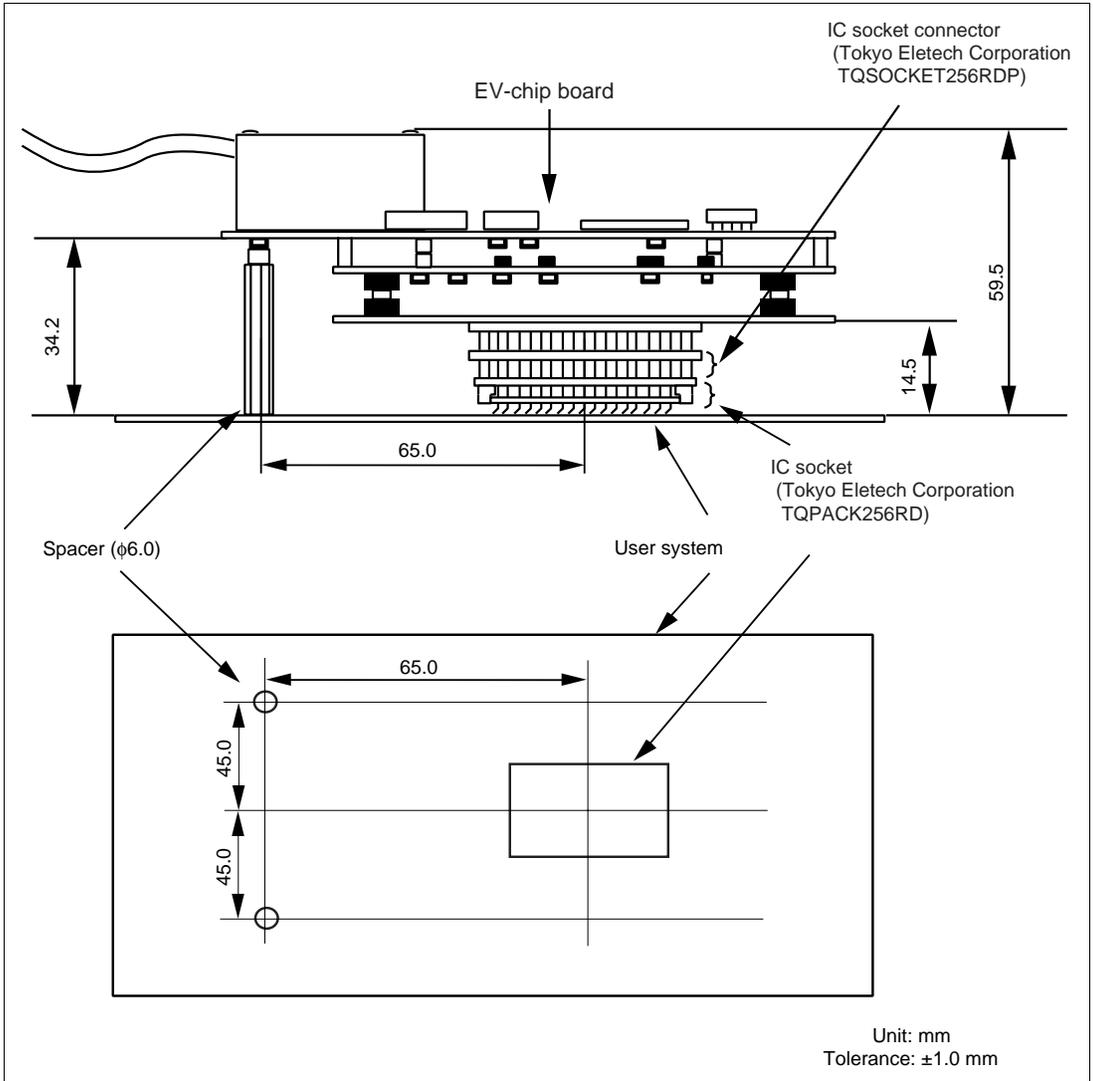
Resulting Dimensions after Connecting User System Interface Board
